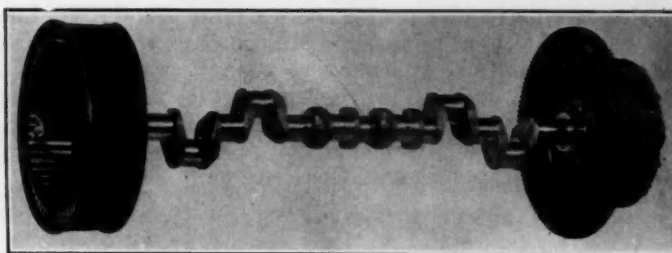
A SINGLE FAN WHEEL MOUNTED ON THE ENGINE CRANK-SHAFT SUPPLIES THE COOLING AIR
